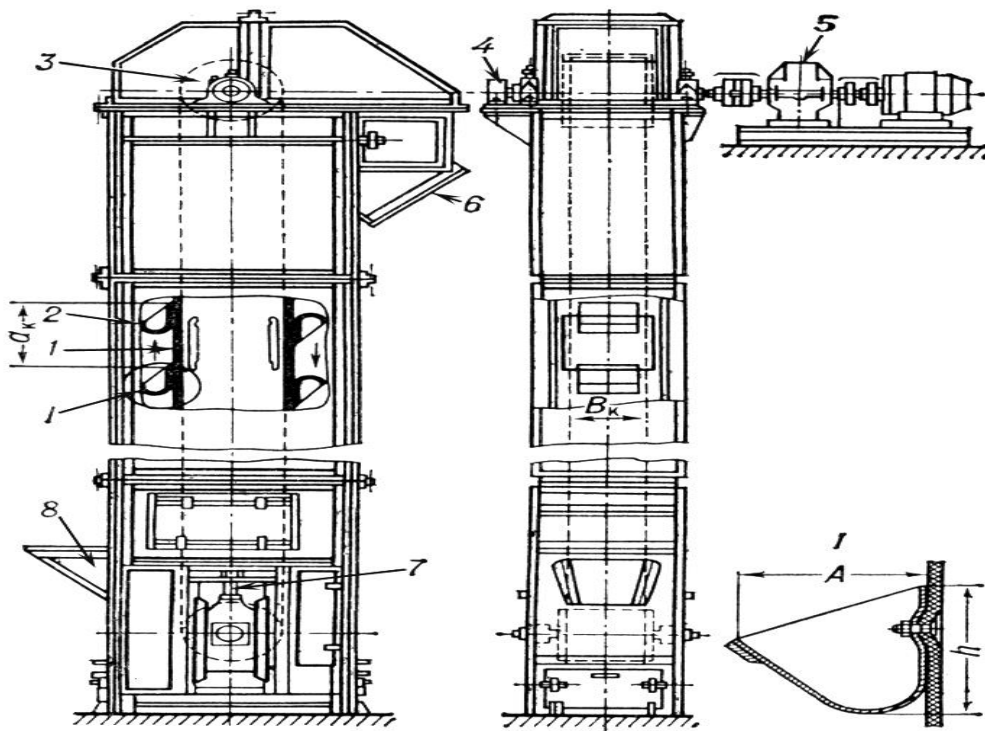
Vertical belt conveyor (Noria): 1 - pulling belt; 2 - buckets; 3 - driving drum; 4 - stopping mechanism; 5 - drive; 6 - discharge pipe; 7 - tape stretching control mechanism; 8 - loading tube
